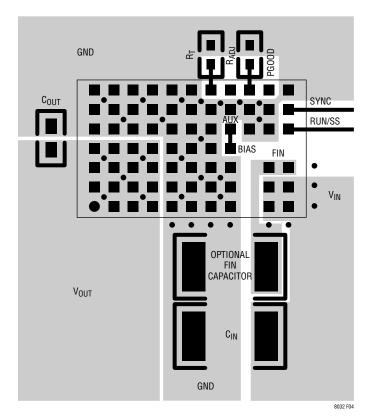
Layout Showing Suggested External Components, GND Plane and Thermal Vias (LGA Package)
